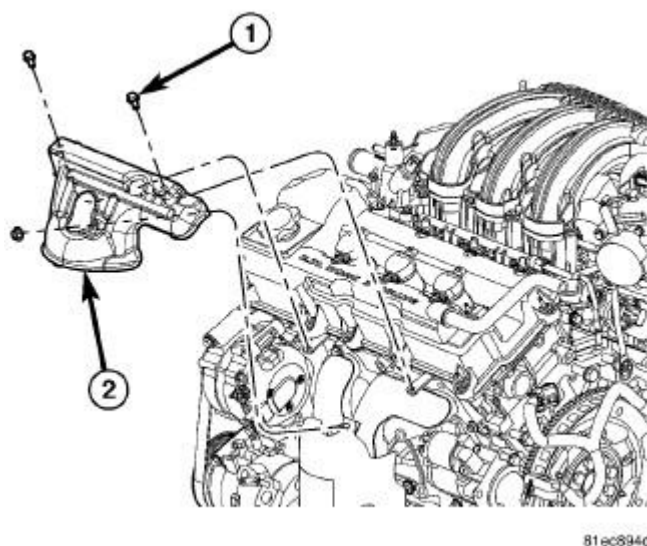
FRONT MANIVERTER HEAT SHIELD
